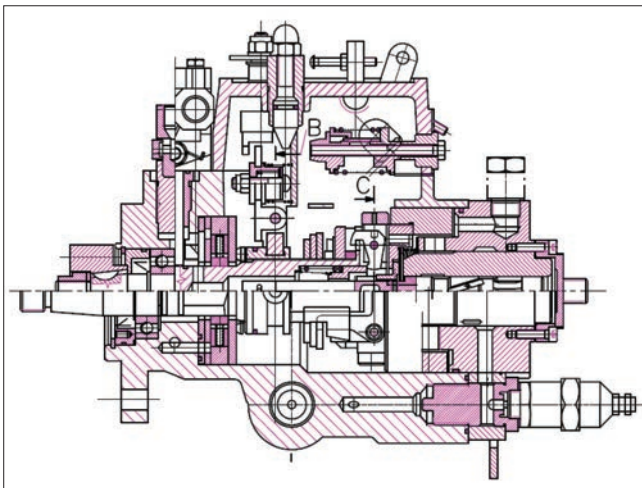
Cross-section of a series 2 distributor injection pump (for 2-, 3-, 4- and 6-cylinder engines) [12]
